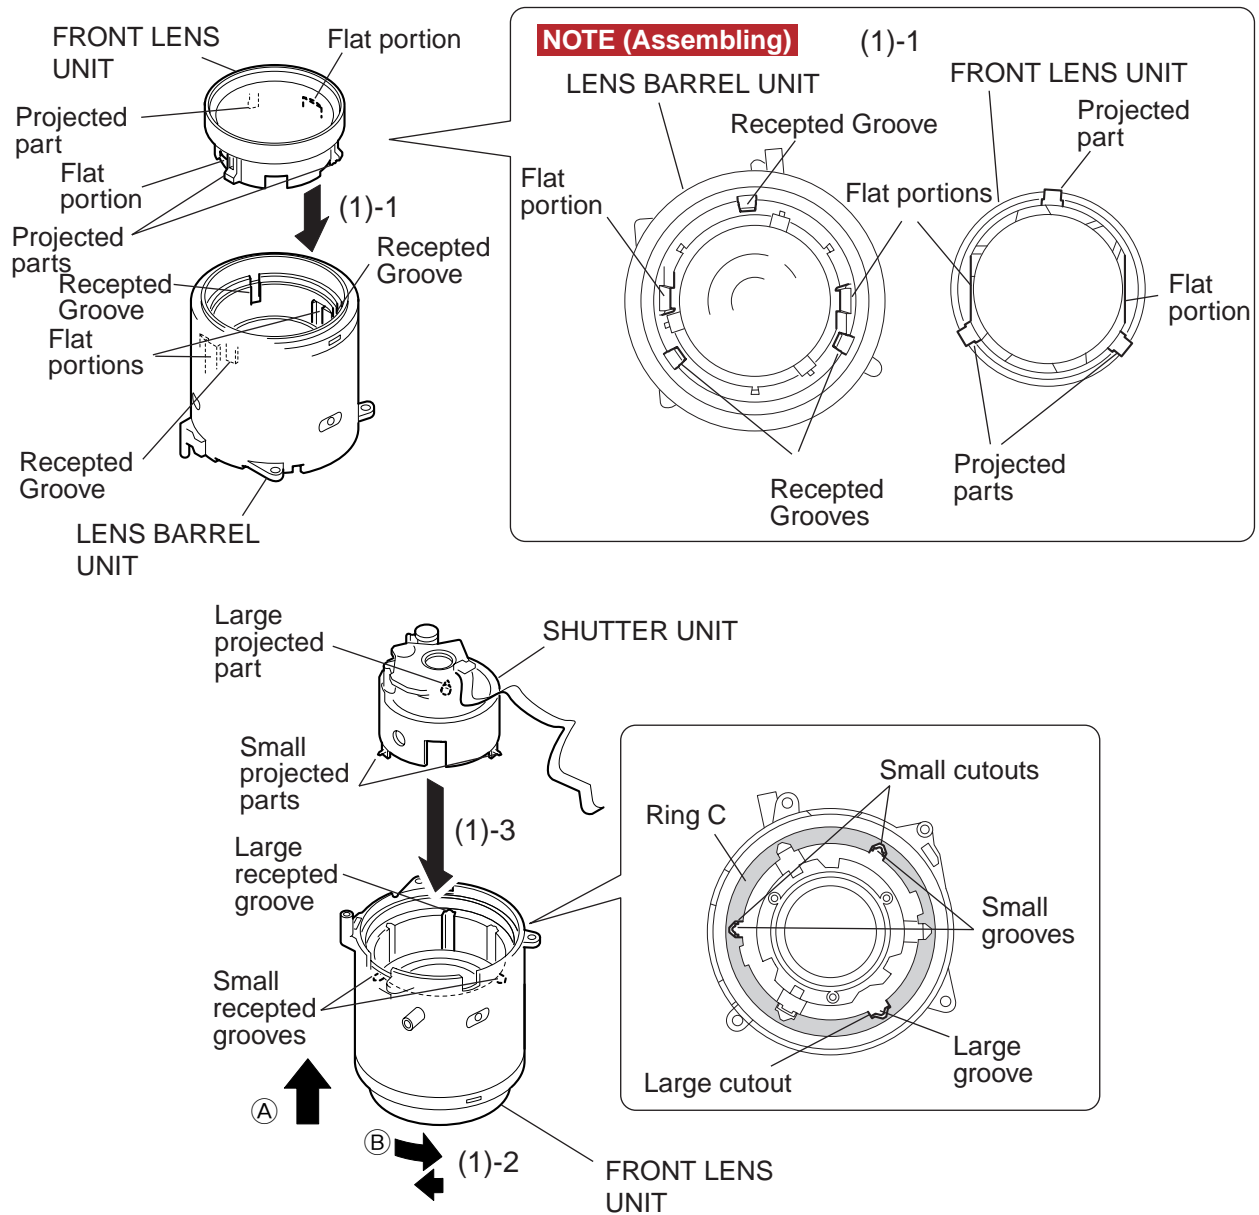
Assembling the CCD HOLDER,SHUTTER UNIT-1
